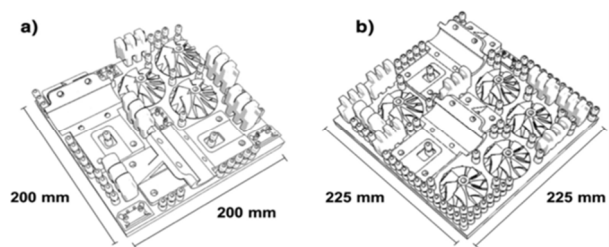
The build platform and printed parts used for the cost calculations in [38]: EBM layout (left, a) and DMLS layout (right, b).
